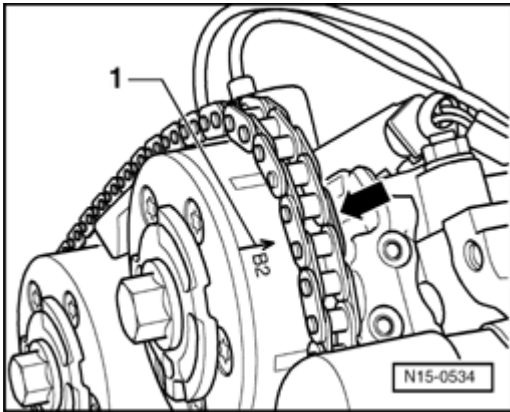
Copper-Colored Chain Link Aligned With Marking On Intake Camshaft Adjuster
